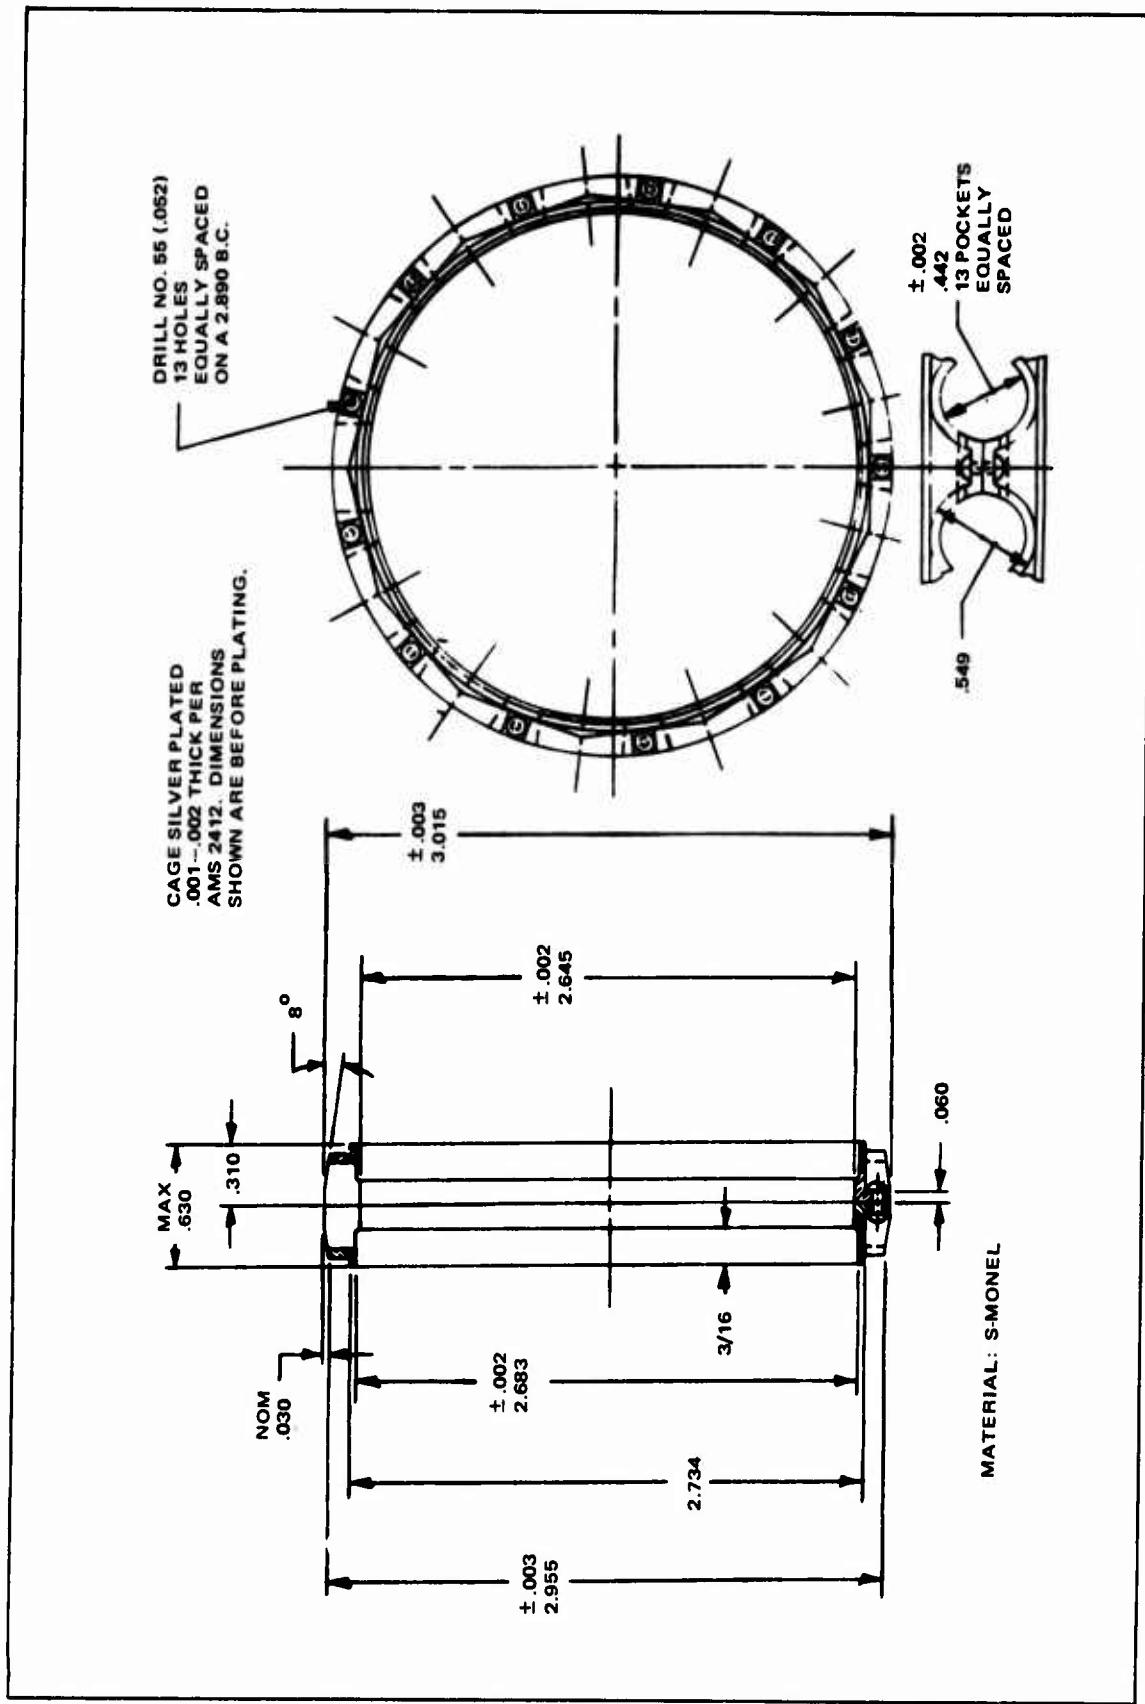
Machined Inner-Land-Riding S-Monel Cage, Design 4.
